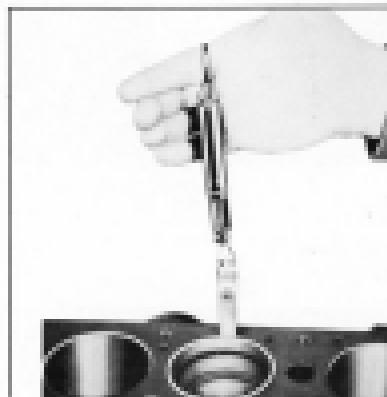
Determining Piston Clearance with Tool 1HM-585
